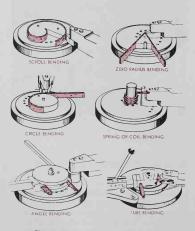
Some bends that can be made on Di-Acro bending machine.
